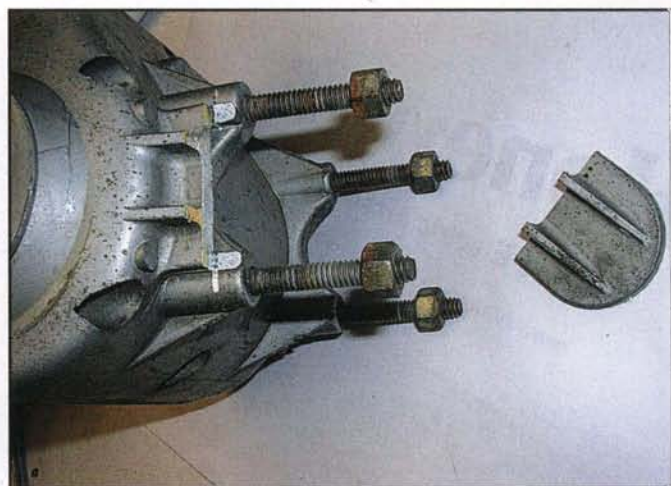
The tab that must be removed from the EL rotator body so that it can be mounted on top the flange.
